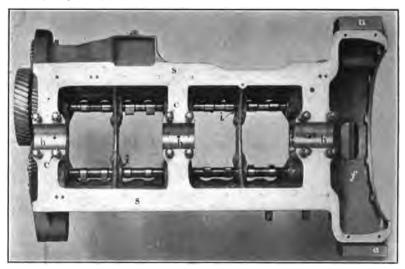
Inverted plan view of upper half of crankcase of the White 16-valve, 4-cylinder engine. (Its manufacture has been discontinued).
